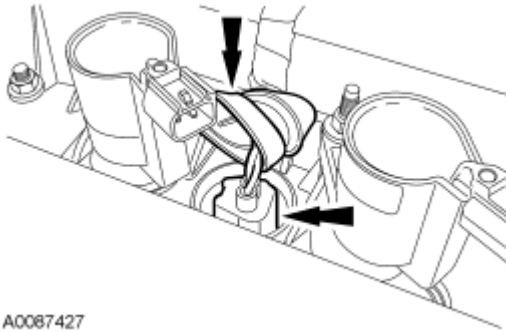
Locating Cylinder Head Temperature Sensor Electrical Connector And Rubber Boot
